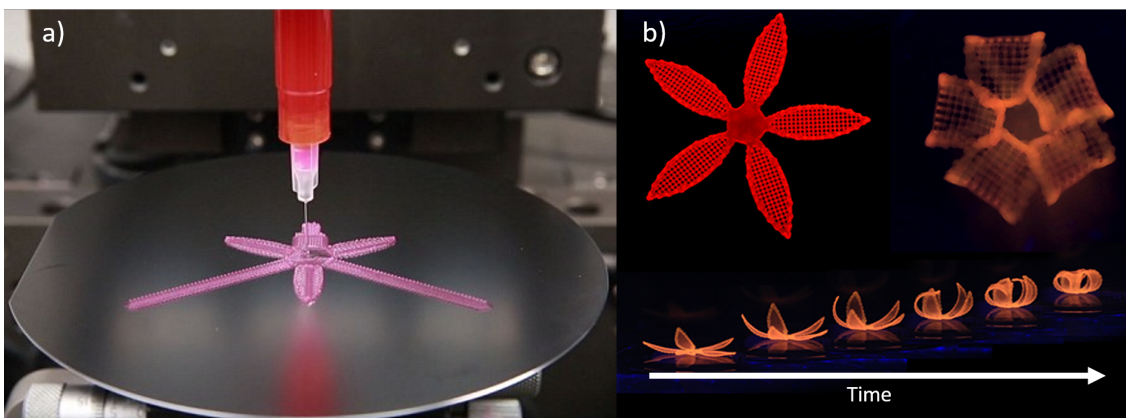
a) A 3D/4D printer extruding UV-cured AAm. b) The resulting printed shape, and its 4D actuation path. Reproduced from [11].
